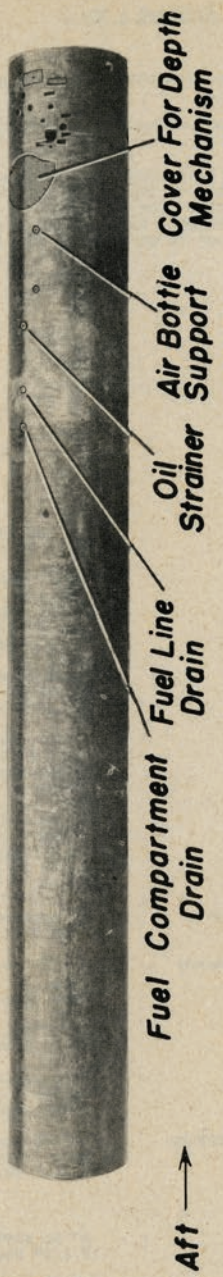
Torpedo Type 93 Model I Mod 2, Flask Section, Bottom View
